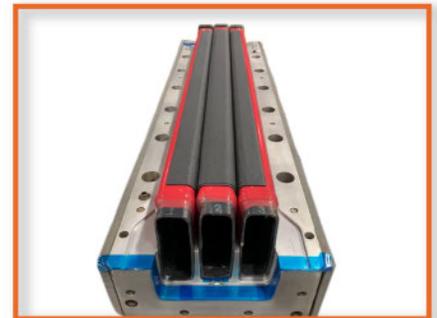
All three Smart Tools loaded into cure mold with pre-preg carbon fiber
